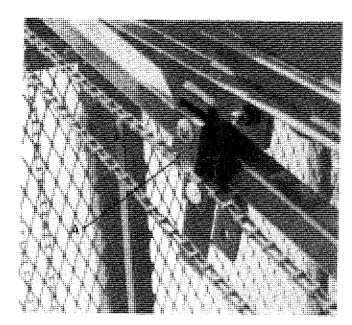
ELEVATOR HEIGHT ADJUSTMENT
